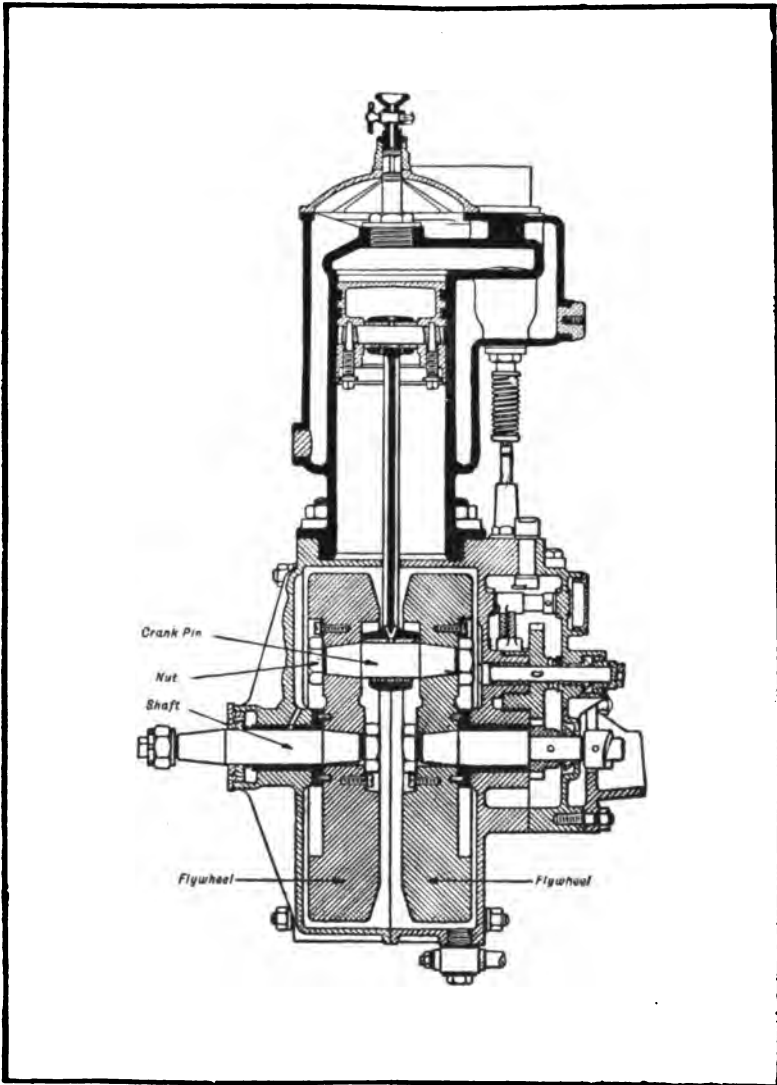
Defining built-up crankshaft construction sometimes used in small motors.
